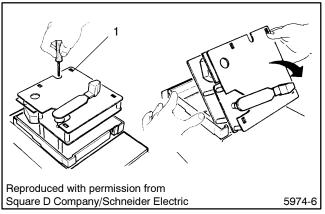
Motor Operator Cover, 800–1250 Amp Models 4. If the motor operator is to be replaced, remove and save the interlock control arm to reinstall later. Rotate the arm counterclockwise to the position shown in Figure 6-11 to remove it.
